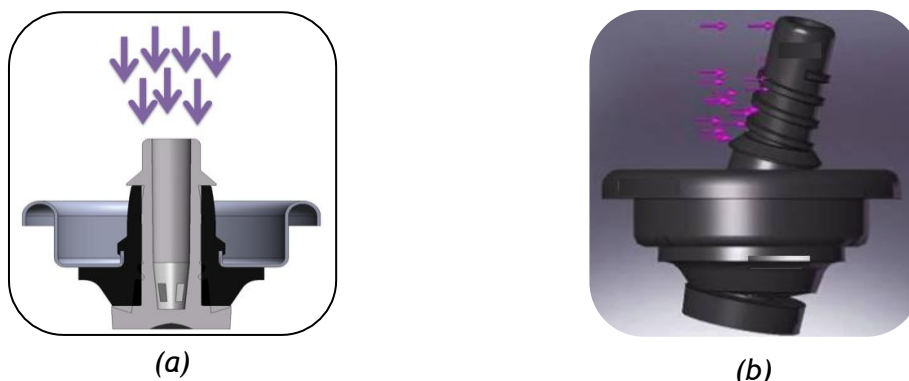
a) Gun valve opening force; b) Tilting valve opening force.
